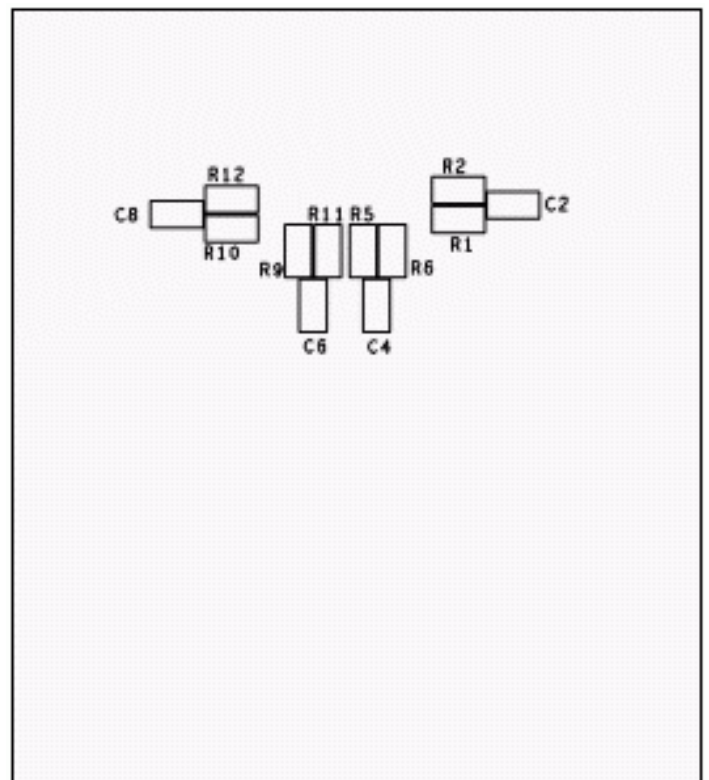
E1x4 120 Ω impedance -- Silkscreen bottom layer layout (view mirrored)
